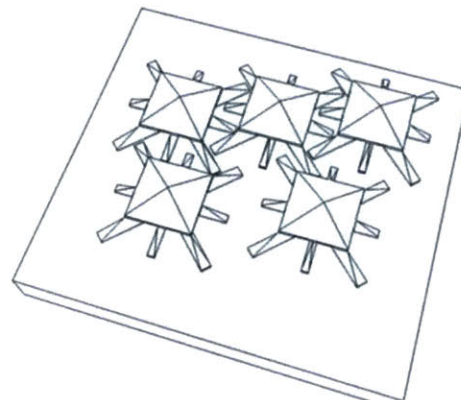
Sample parts printed on a Fortus 400MC with ABS material machine [92]
